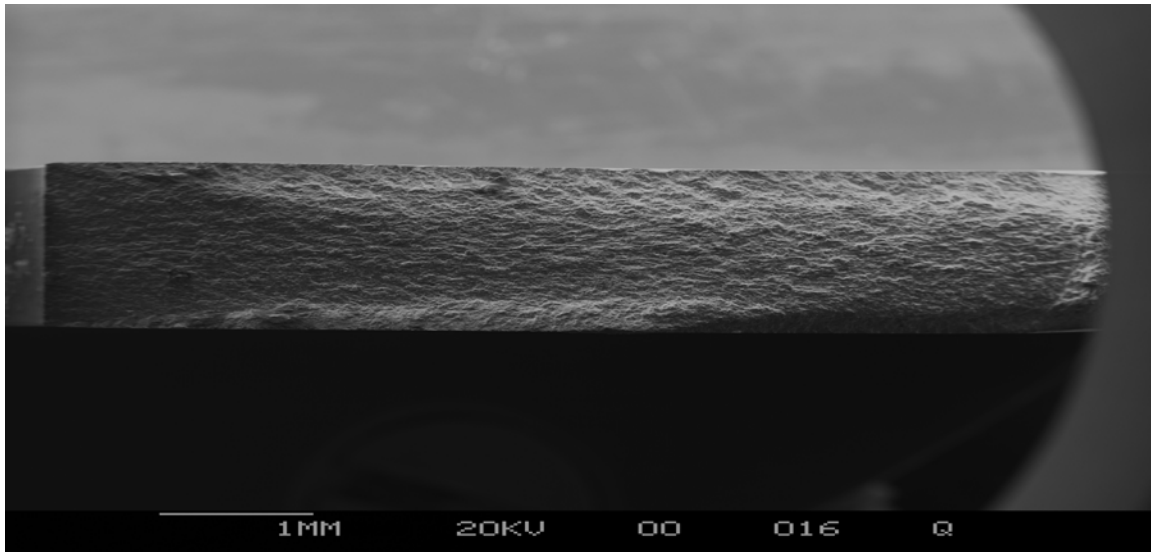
Fracture surface of specimen 6 showing entire fatigue area
